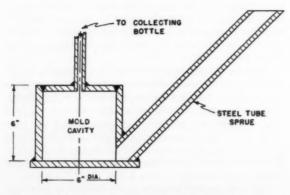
Welded steel pot mold with steel tube sprue.
